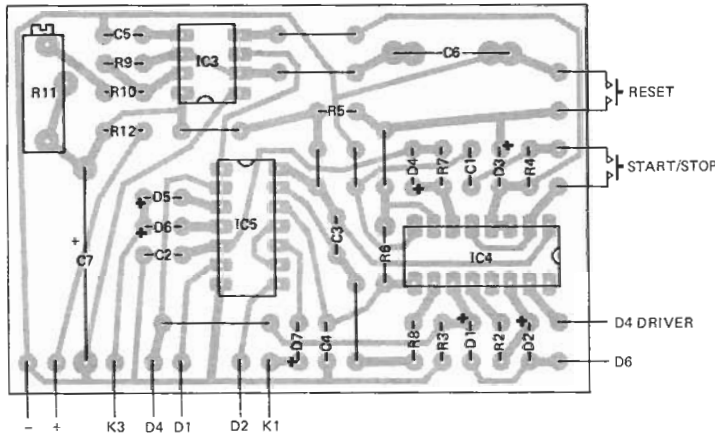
COMPONENT PLACEMENT of stopwatch circuit board. Connections are made to calculator board.
